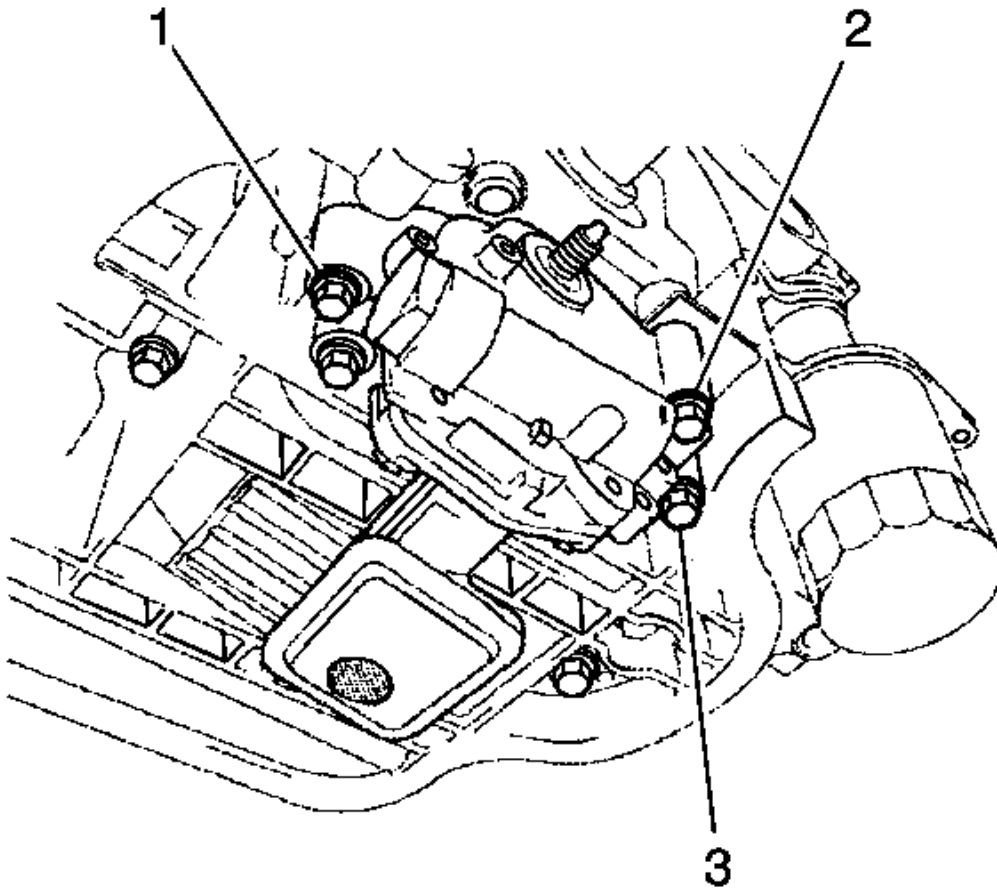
Identifying Oil Pump, Gasket & Bolts
